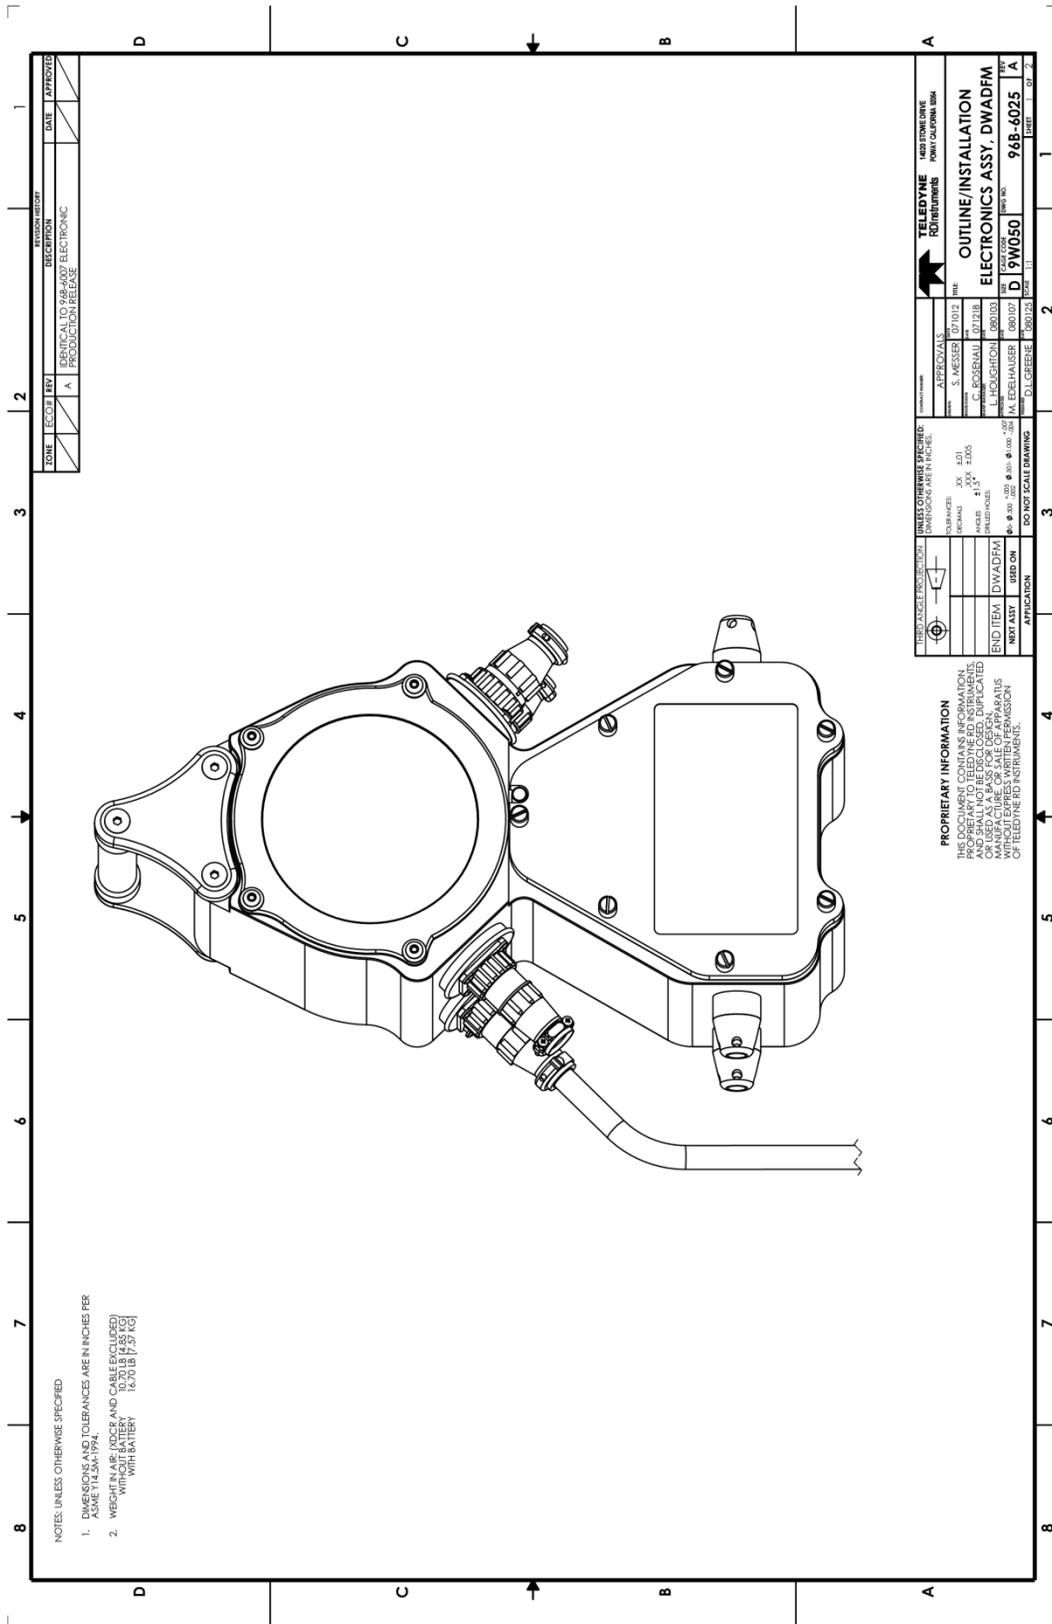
Outline Installation Drawing 96B-6025 Sheet 1
